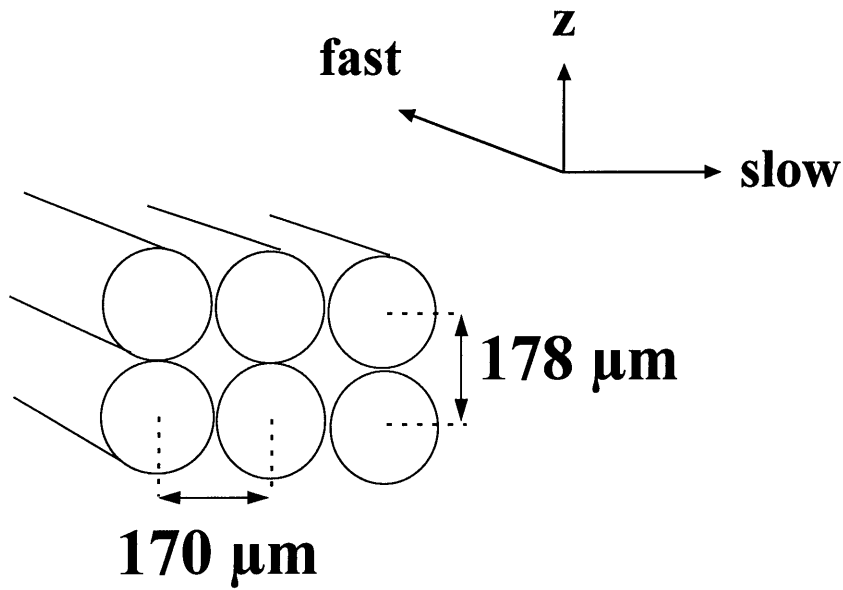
Lines are stacked right on top of each other in the linear raster print style. The dimensions that were used are indicated in this drawing.
